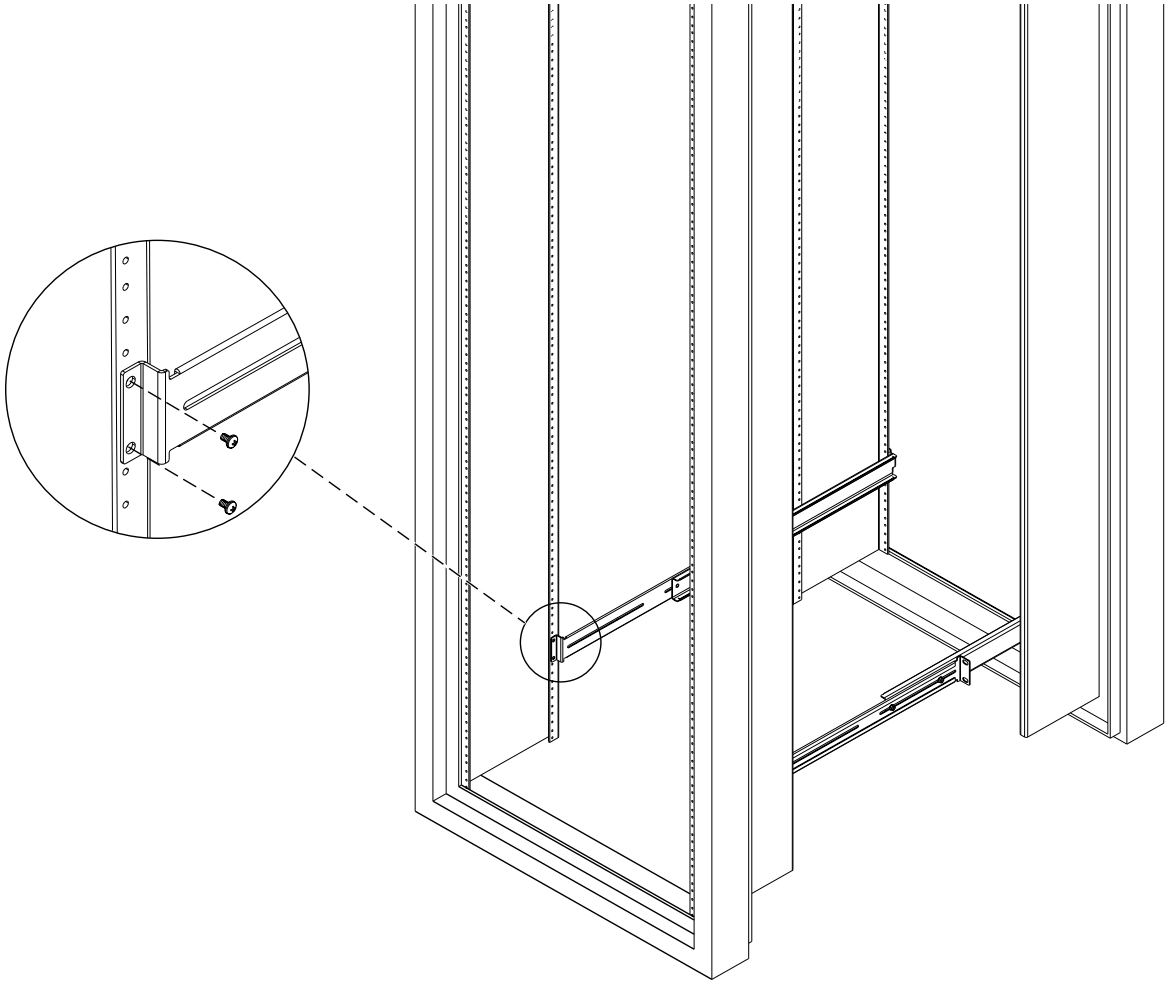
Fixing Slide Mounts in Sun 72-inch Expansion Rack – Rear View (side panels removed for clarity)
